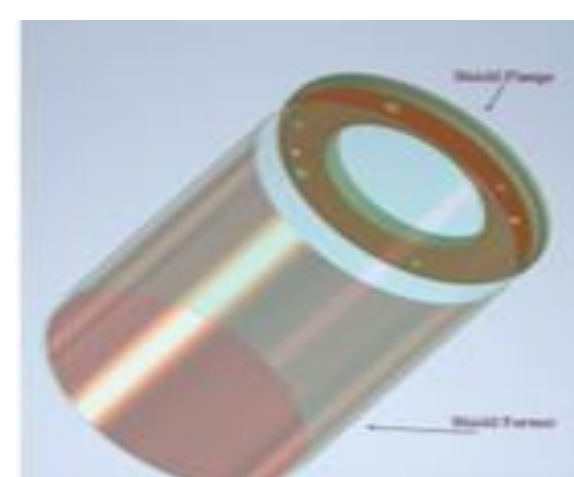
Computer-Aided-Design Model of copper laminated shield former and shield flange assembly
